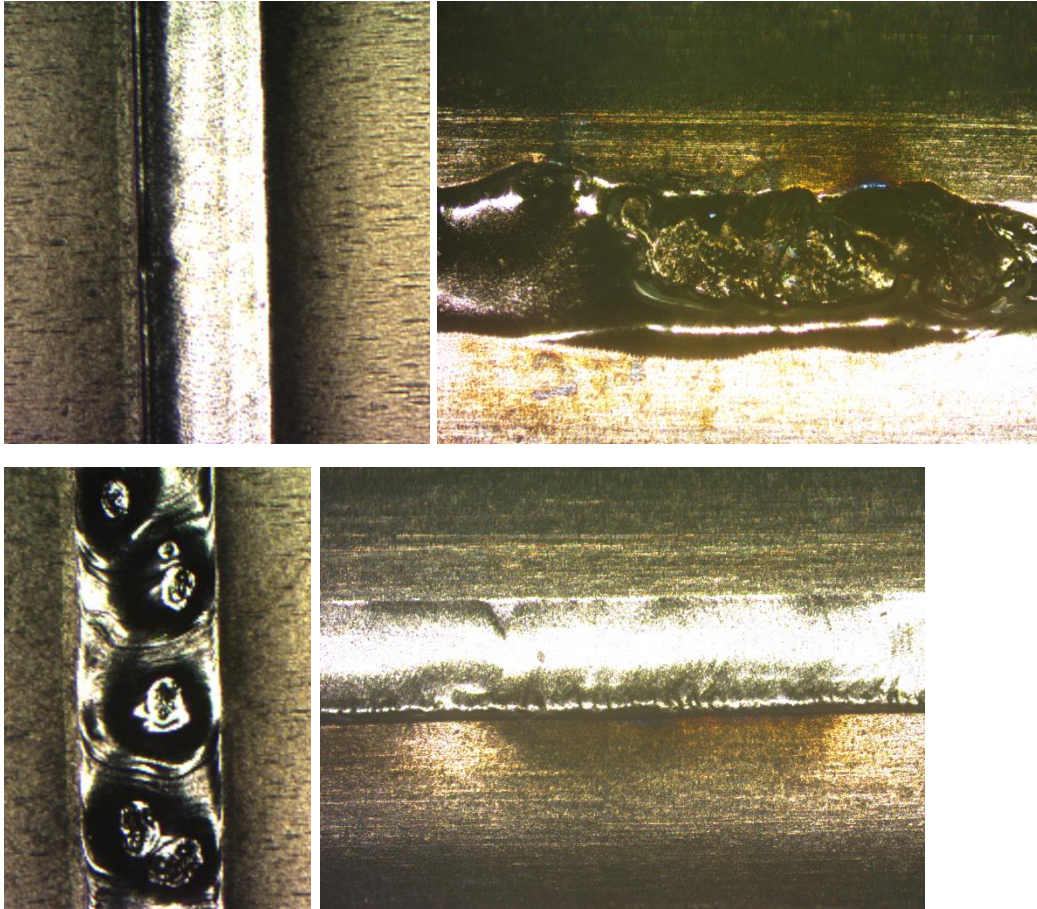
Top row, left to right: good weld – consistent weld bead width, burn through. Bottom row, left to right: craters, edge failure (torn along the bottom edge).
